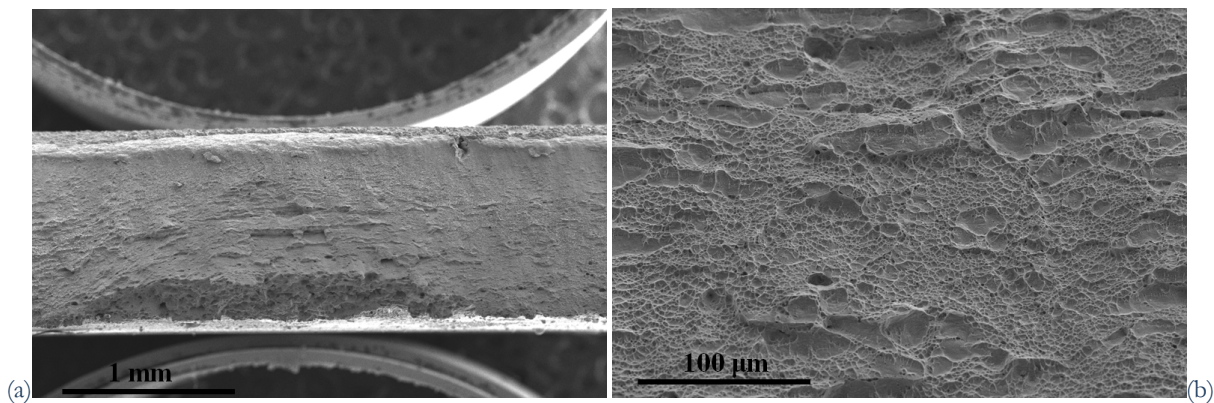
Fracture surfaces of TWIP/Mn-B welded joint arising from incomplete weld penetration. Fracture in the interface between fusion zone and HAZ of TWIP steels. Macroscopic (a) and microscopic (b) views.
